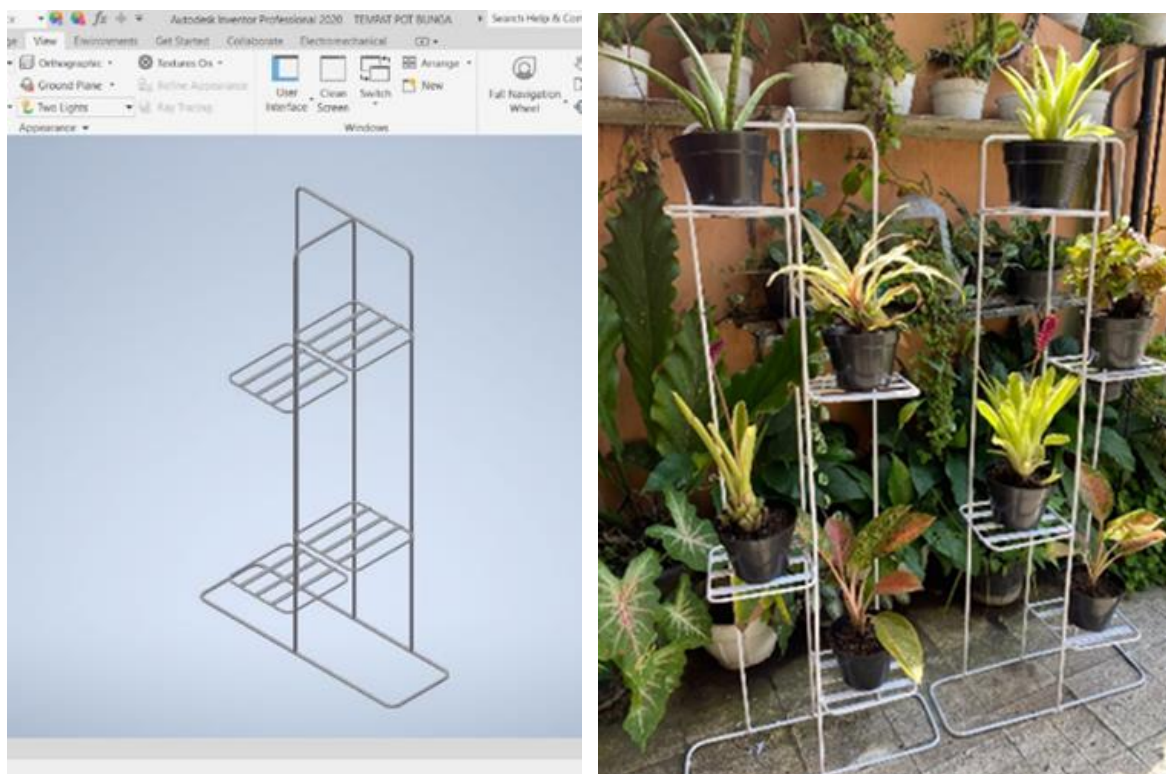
Design drawing of plant shelf (left) finished shelf (right)
